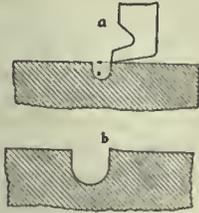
SHARP EDGE PRODUCED AT THE EDGE OF AN OIL GROOVE BY AN ORDINARY TOOL.
